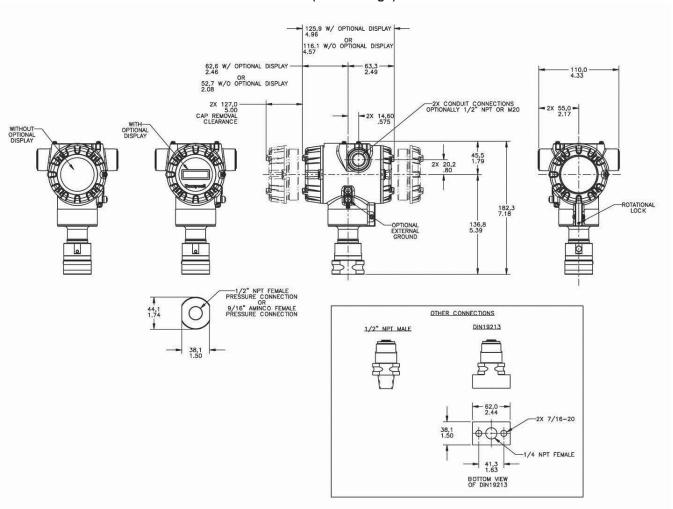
Typical mounting dimensions of STA82L, STA84L, & STA87L for reference
